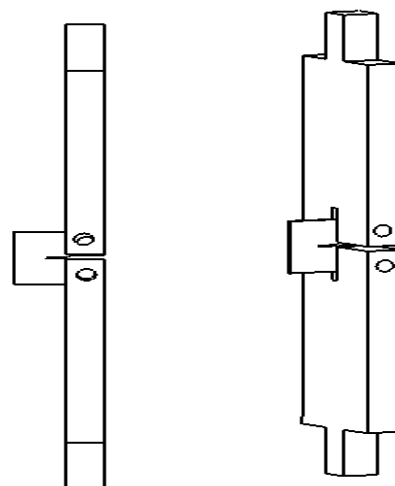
Schematic of how the toughness test specimen is fitted into the mold
